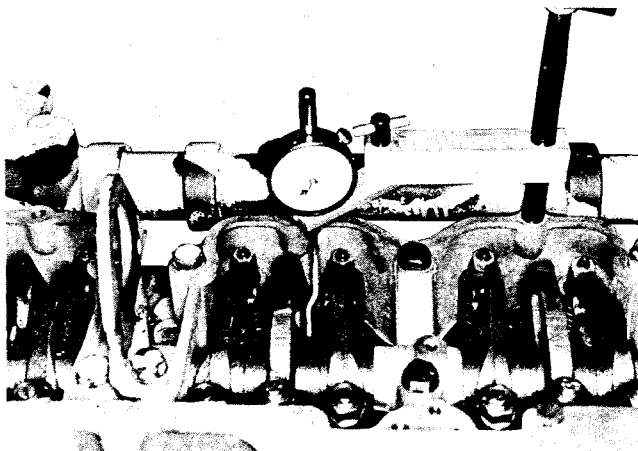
, (N114231). Dial indicator in place — extension in contact with plunger — N-855
